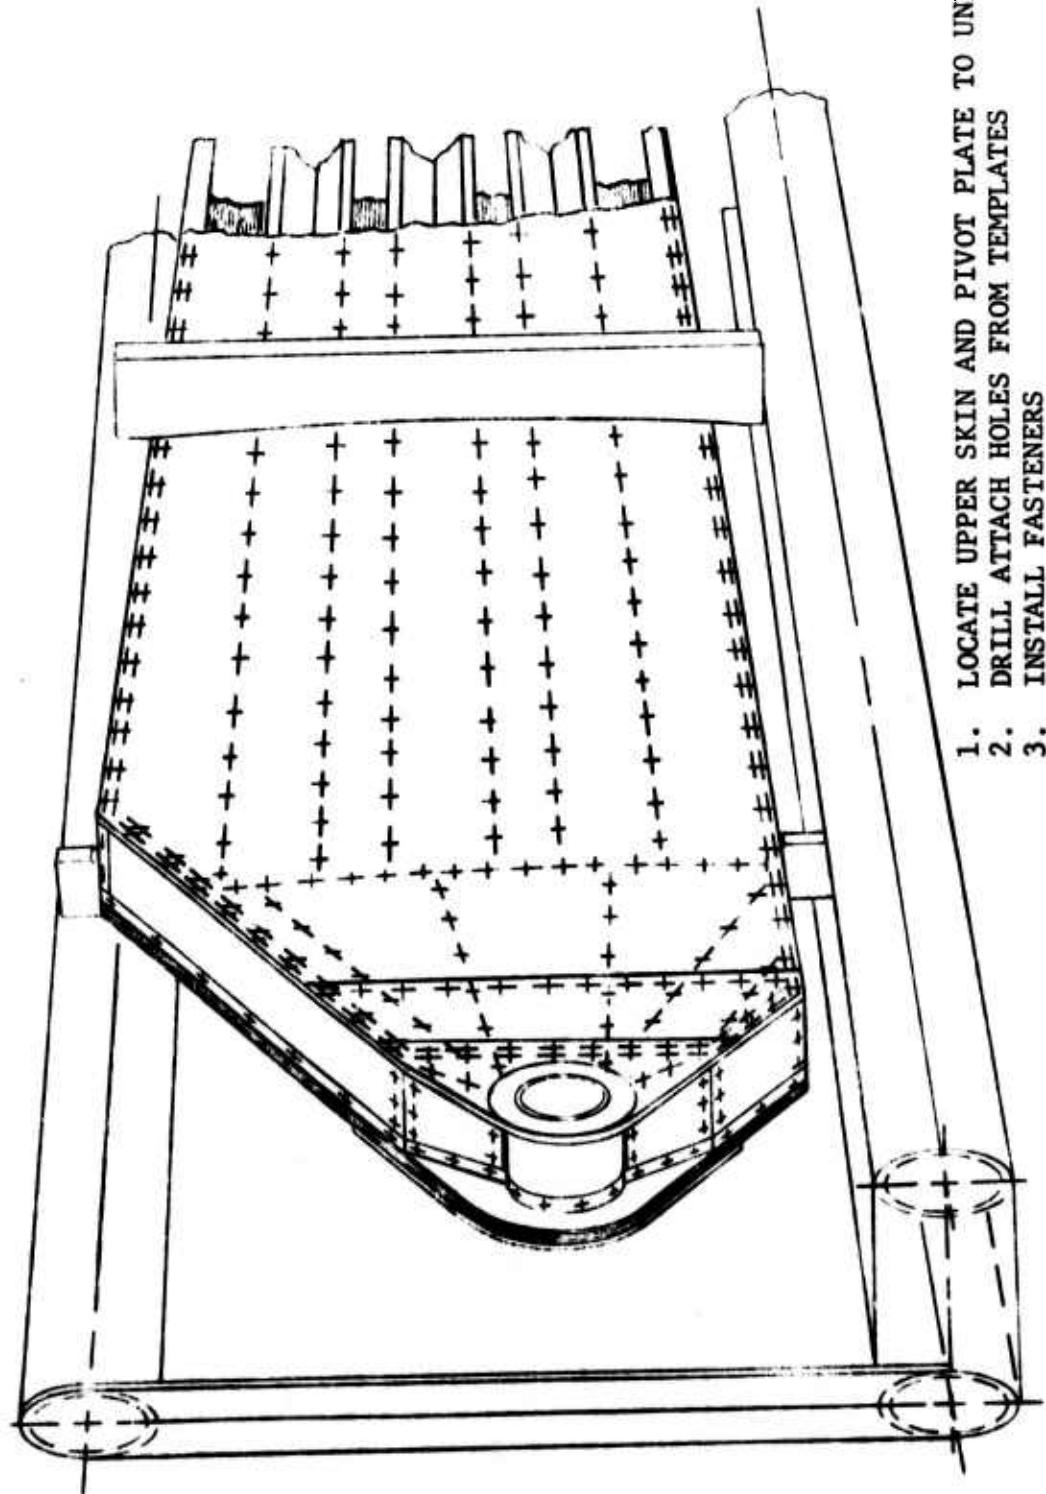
Secondary Manufacturing Final Assembly Upper Skin and Understructure
